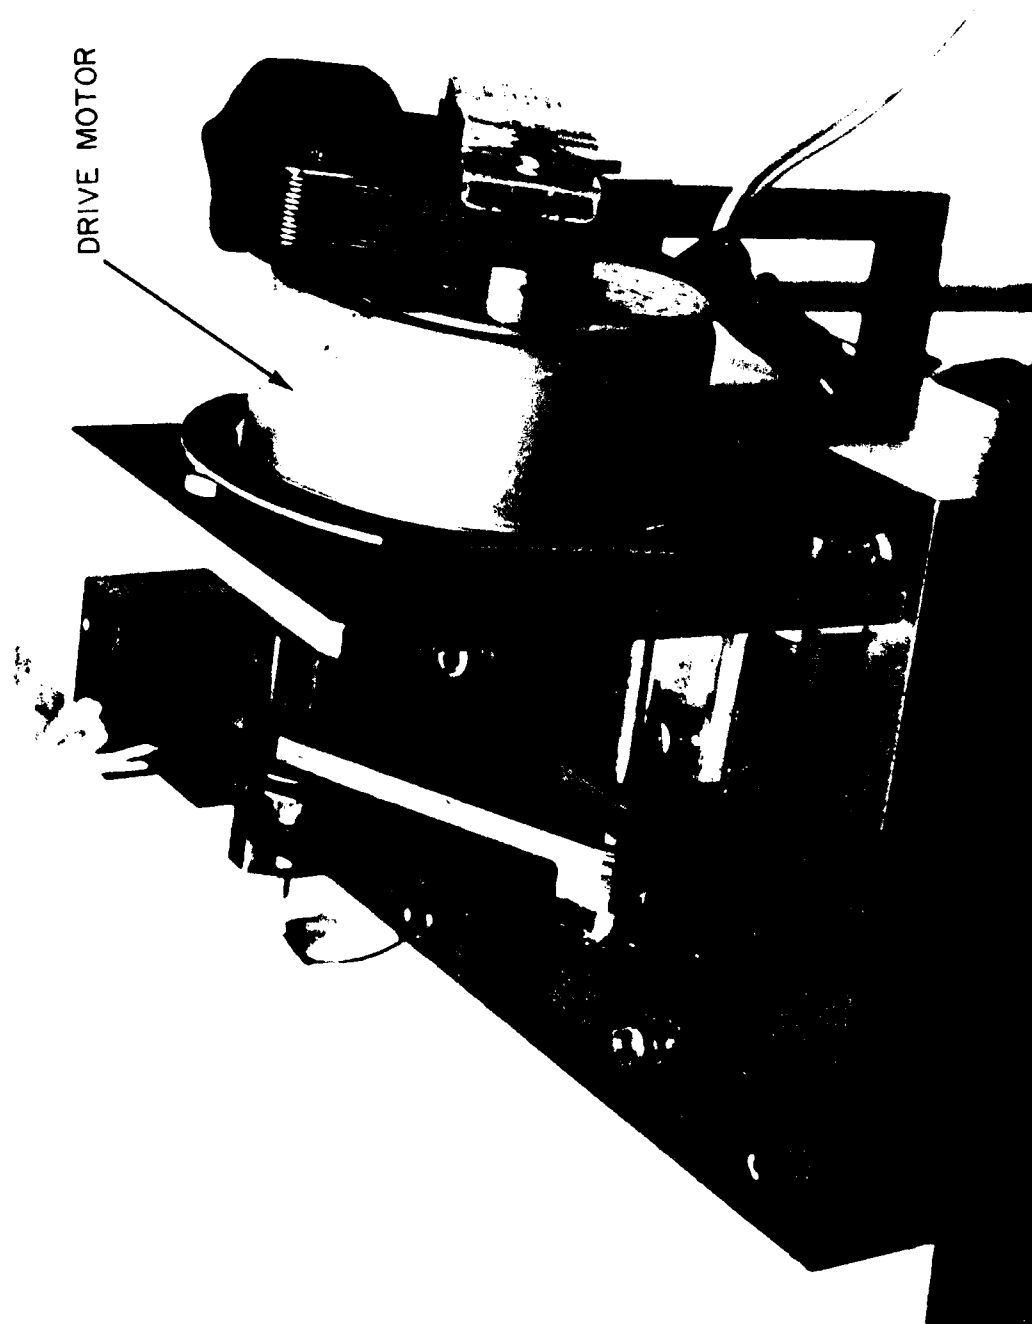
Drive Motor Installation; Radial/Axial Gage Module
